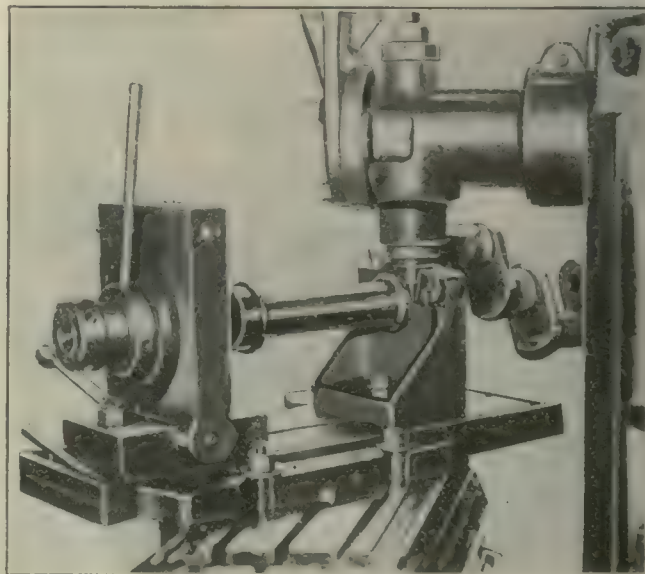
CUTTING BEVEL GEAR ON CRANKSHAFT
